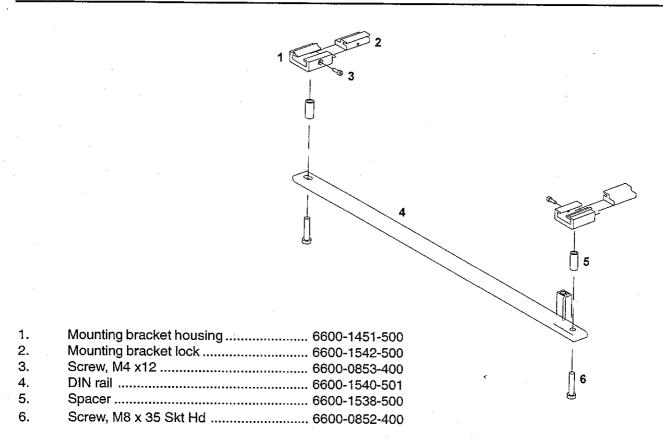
E-Cylinder holder (6600-0836-800)
